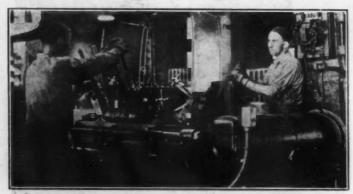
BUTT-WELDING Two HALF-SHROUDS TOGETHER This Is the Most Modern Method of Welding Body Panels
